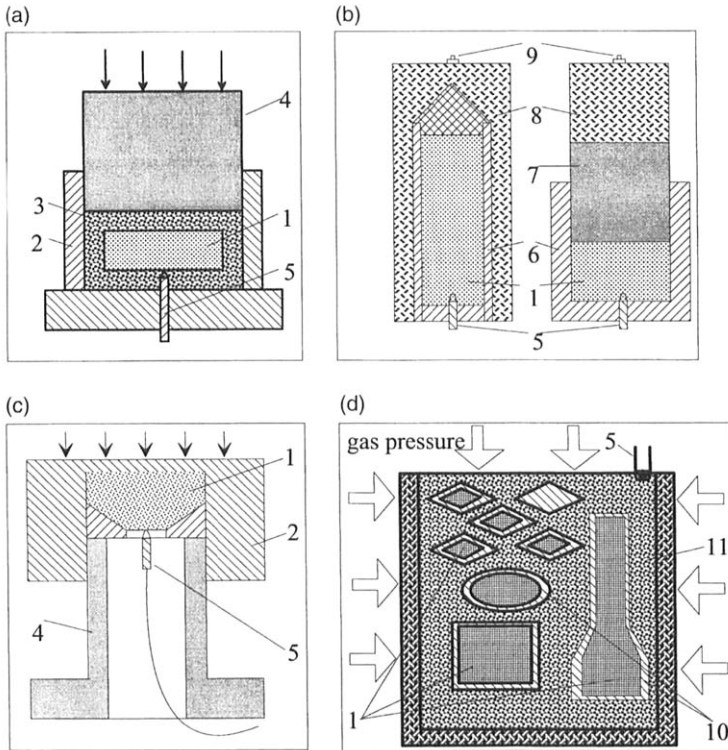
Schemes for SHS densification. 1—sample; 2—press die; 3—pressure-transmitting medium; 4—pressing body; 5—ignitor; 6—metal container; 7—massive piston; 8—explosive; 9—electric fuse; 10—glass containers; 11—“chemical furnace” mixture.
